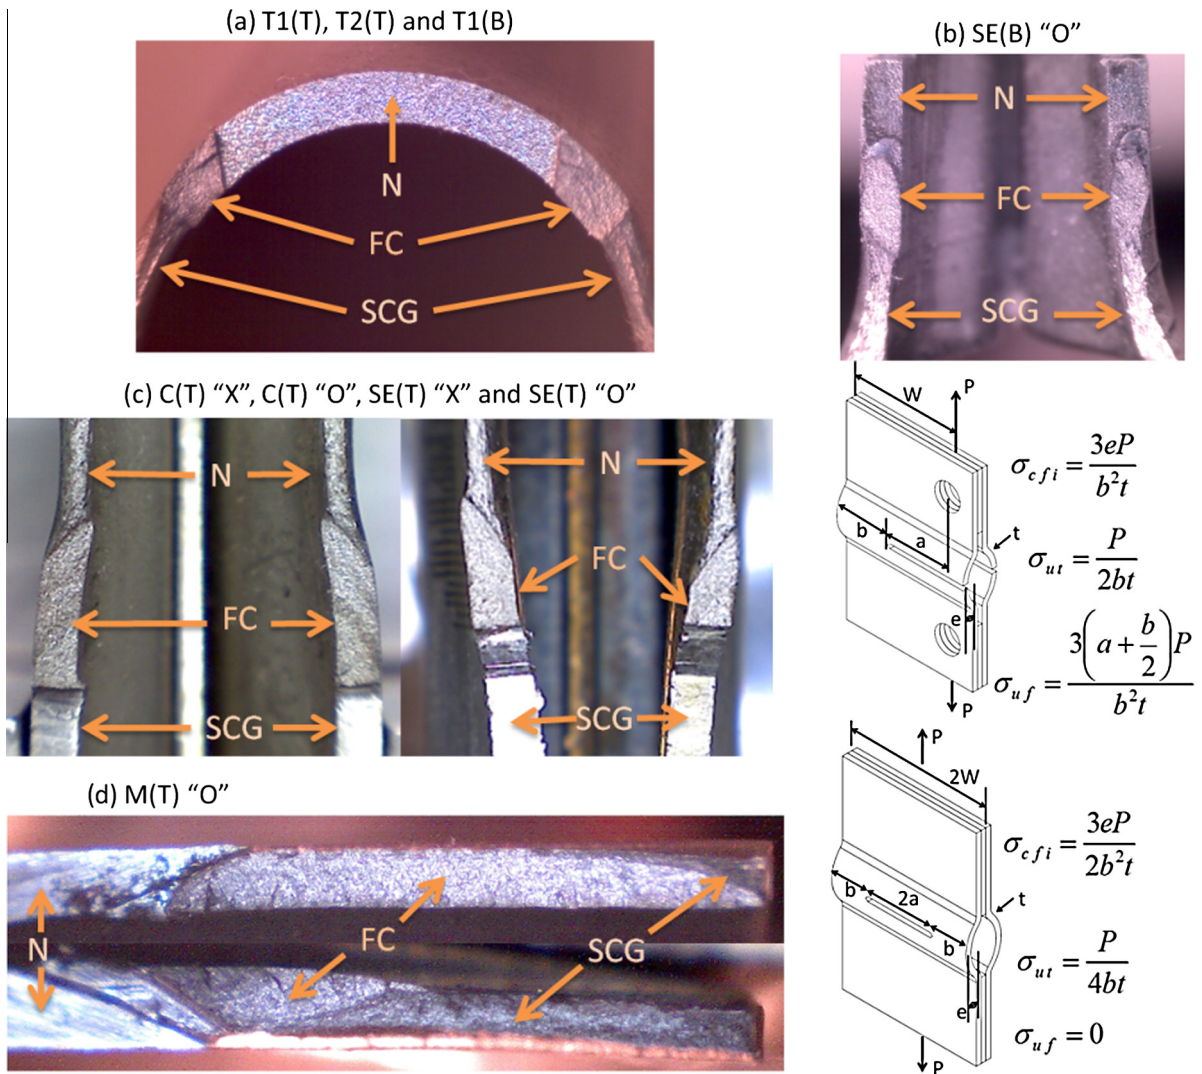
Fatigue pre-cracking for different specimens (N: electric discharge machining induced notch, FC: fatigue crack, SCG: stable crack growth).
